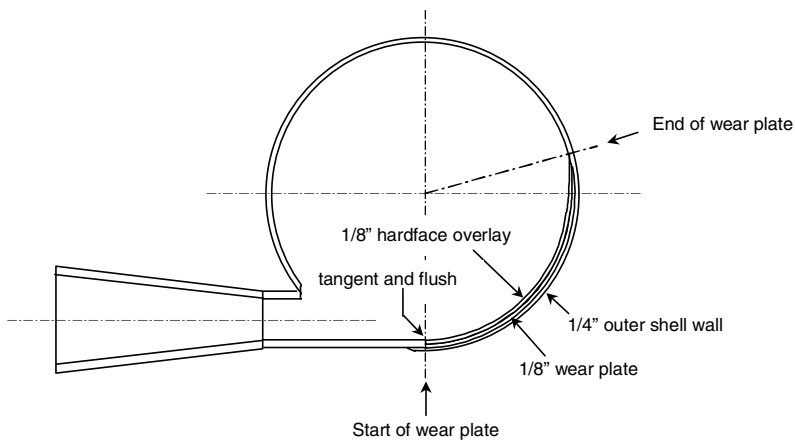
Cyclone with a entrance ‘target zone’ wear plate consisting of a $1/8^{\text{th}}$ inch thick ‘wear plate’ with a $1/8^{\text{th}}$ thick hardface overlay metal. Finished wear plate is designed to be tangent and flush with inside surface of cyclone at leading edge
